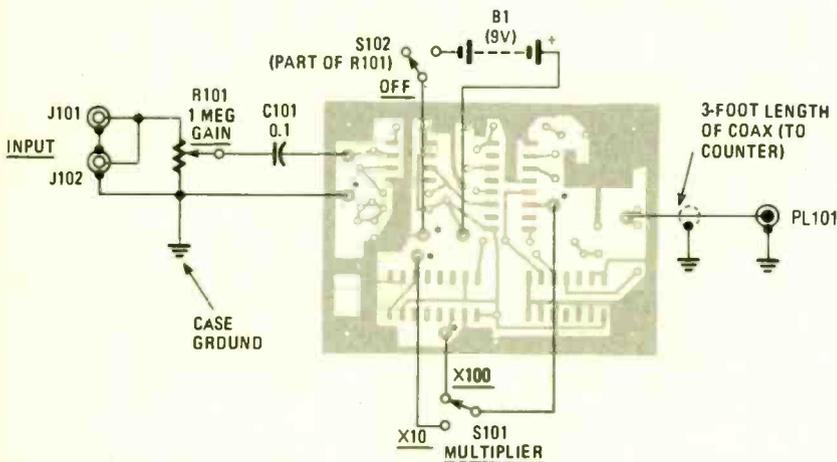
CONNECTIONS TO CASE-MOUNTED parts. Shield of coax used for output is tack-soldered to ground foil on bottom of board.
